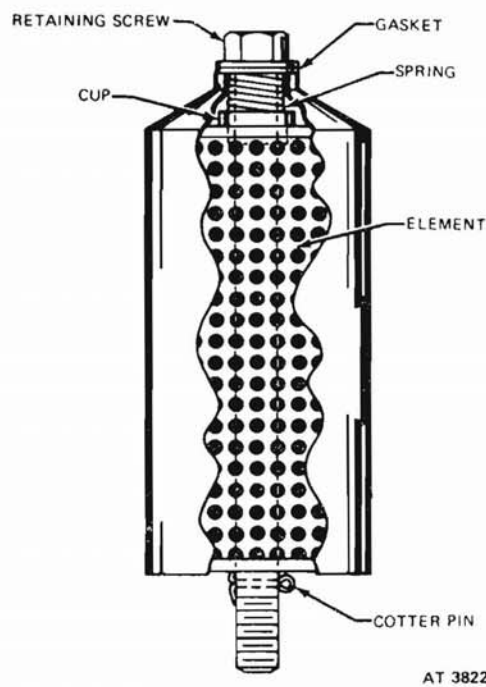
Engine oil filter (LD465-1 and LD465-1C multifuel engines)
